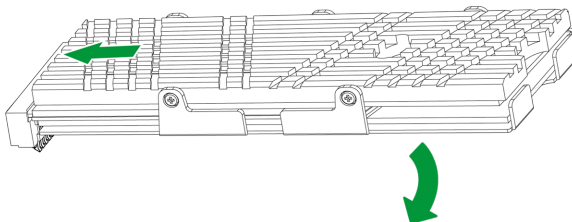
Inserting the M.2 Heatsink Assembly and Pressing it Down
